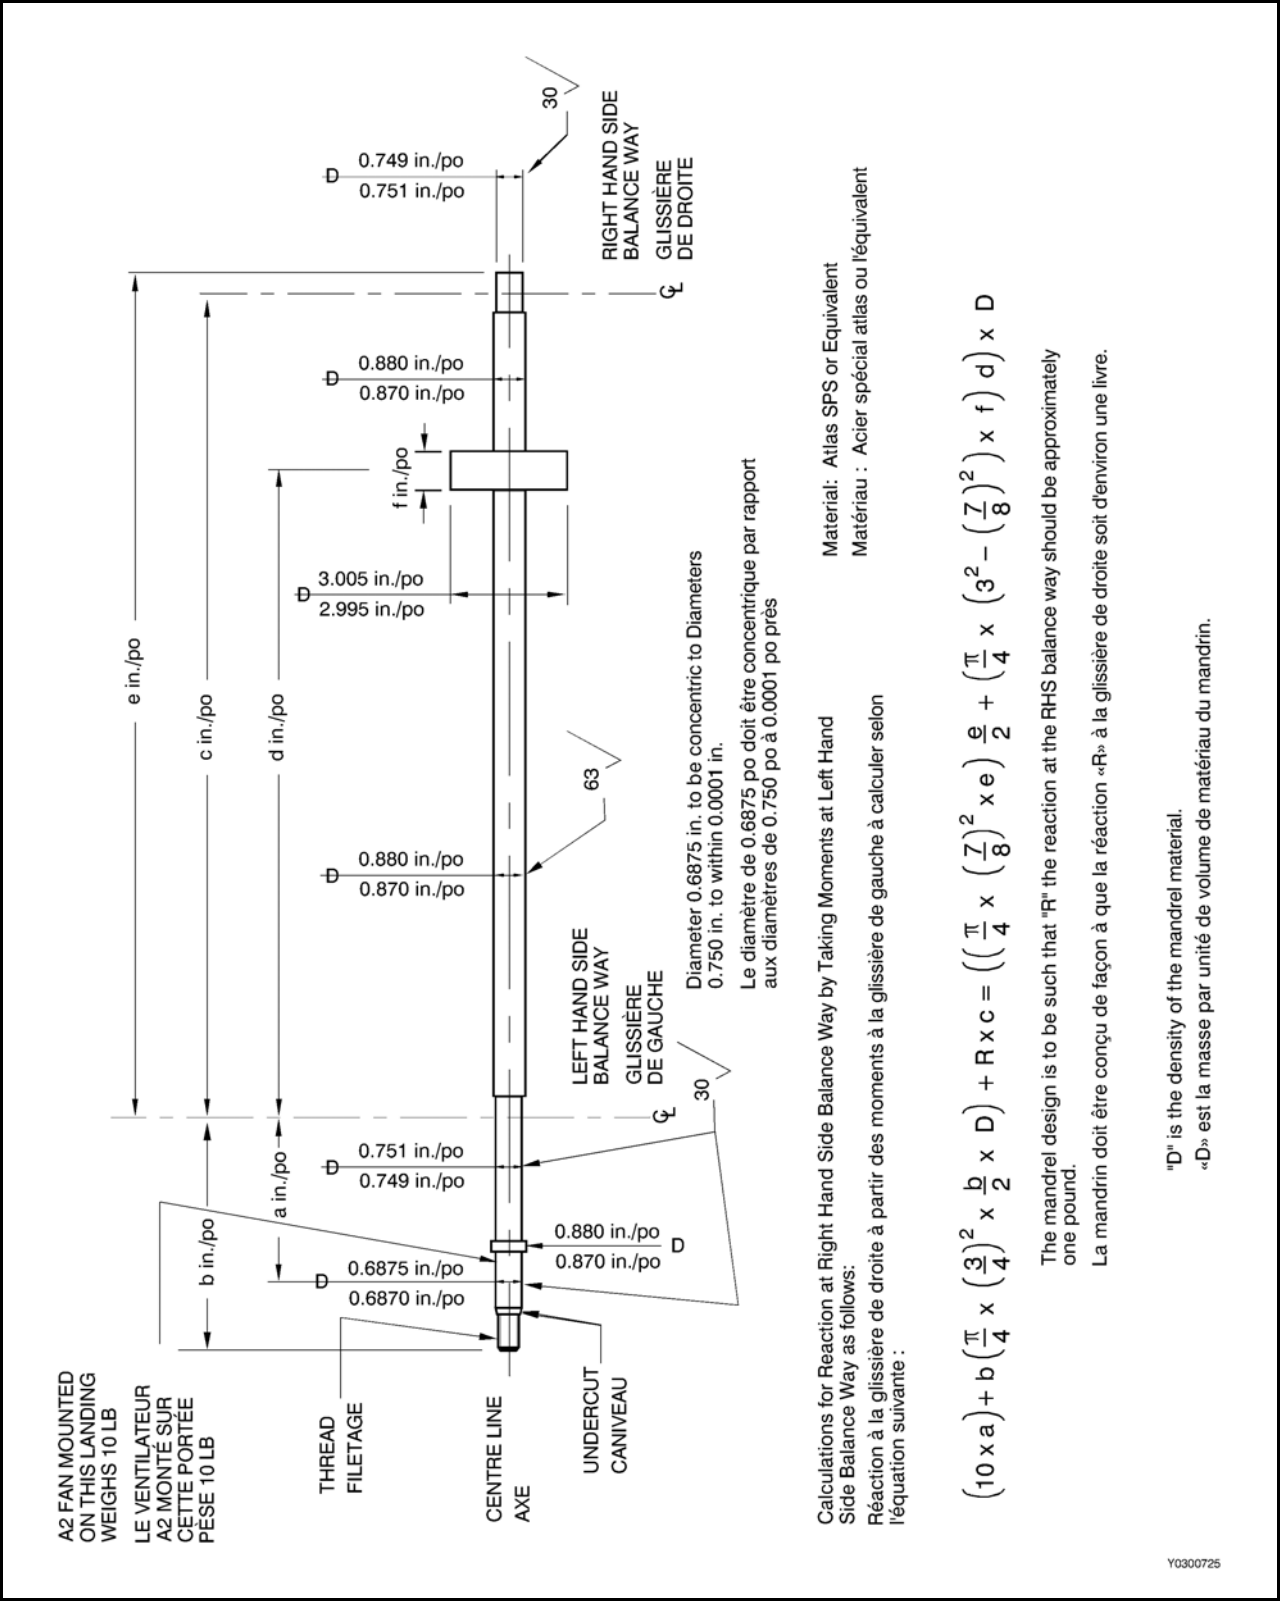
Mandrel for Single Plane Balance of Wheel Assembly A2 Fans
